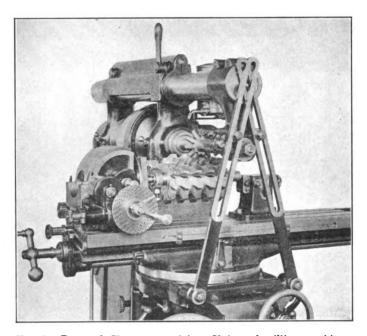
Brown & Sharpe cone driven Universal milling machine.
